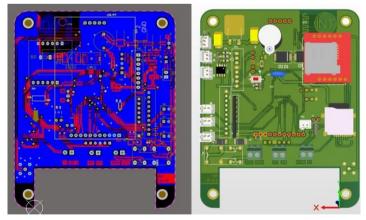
Initial design of the top and bottom faces of PCB on computer.
